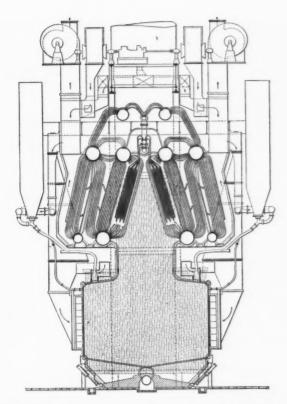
The largest capacity steam-generating unit in the world, pulverized fuel fired, consisting of three pass bent-tube boiler, integral economizer, air preheater, and employing both forced- and induced-draft fans
